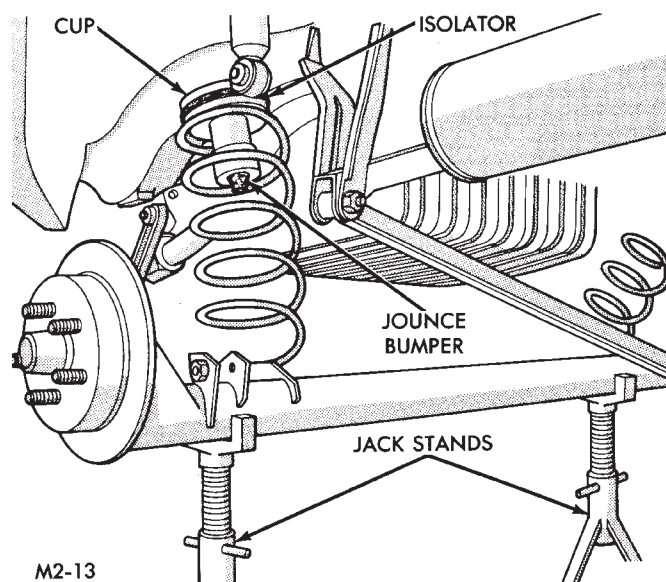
Remove Shock Absorber and Track Bar Bolts
